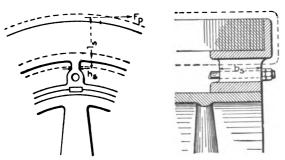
Ring-Core Armature Driven by Pulley and End-Rings.
